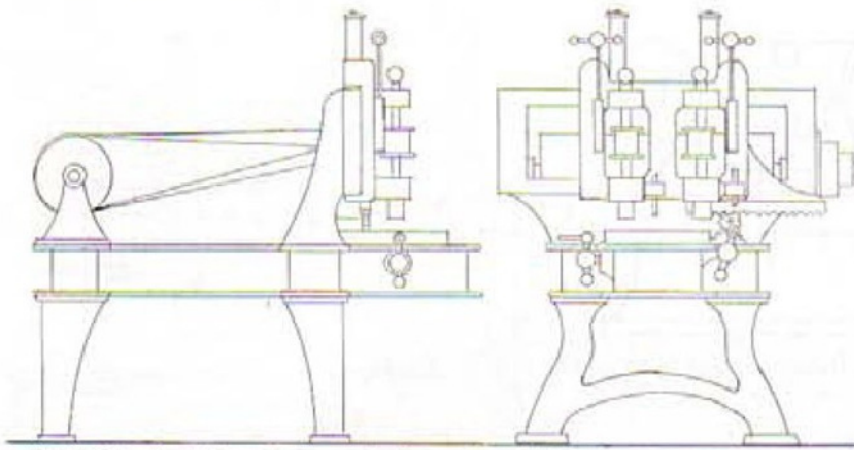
Sketch of Howe's two spindle profile milling machine, 1848.
